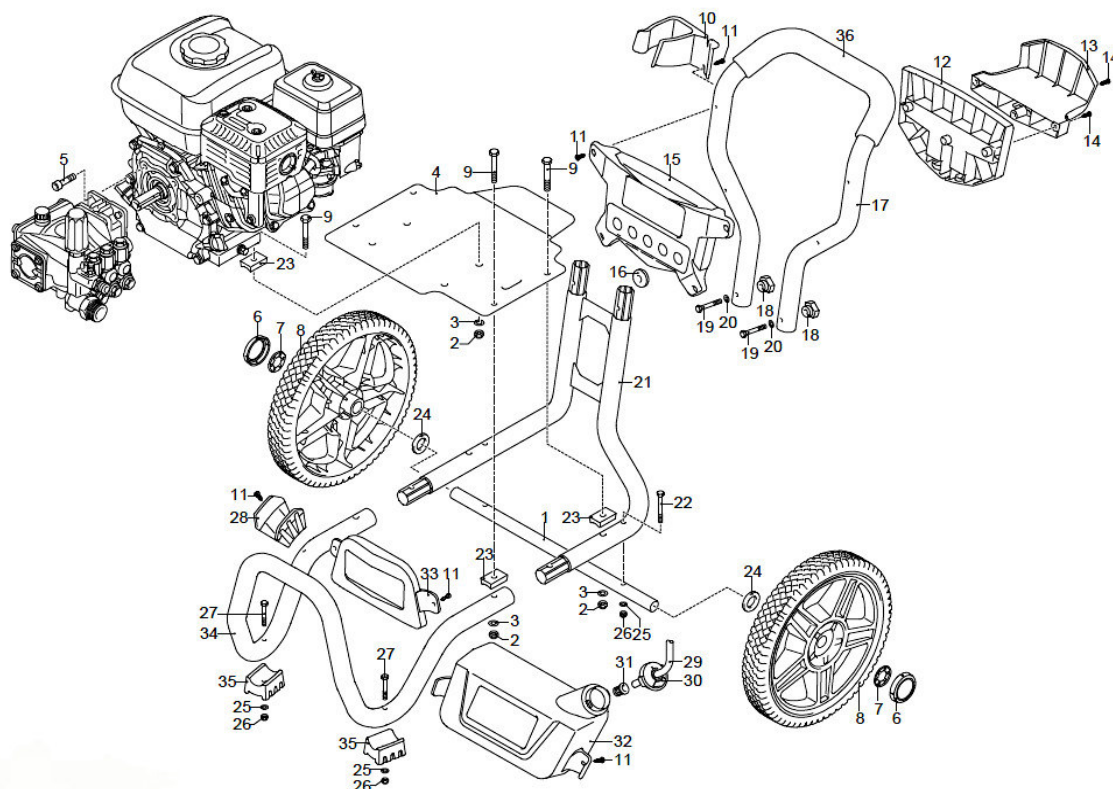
Spare parts drawing 1 and spare parts drawing 2 HDR-K 66-20 BL
